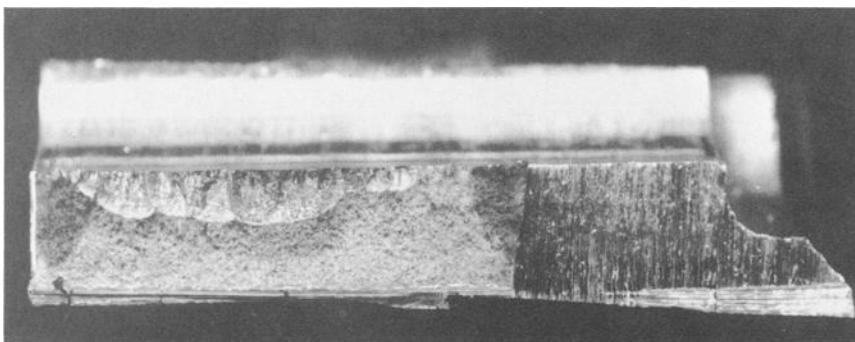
Crack progression in lower skin wing outer panel 51 percent spar bolt hole.
